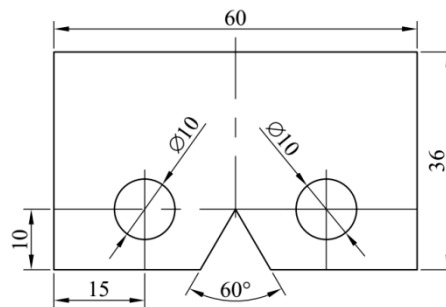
Shape and dimensions of the specimens for Kahn tear tests (mm).
